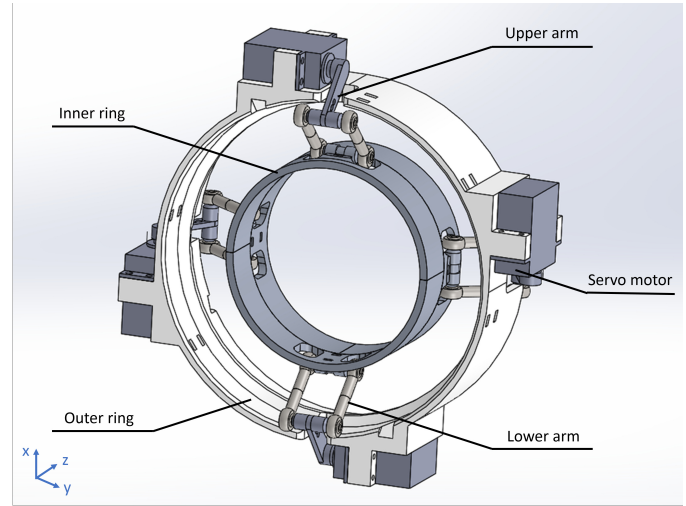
CAD model of the prototype, with the main parts highlighted.
